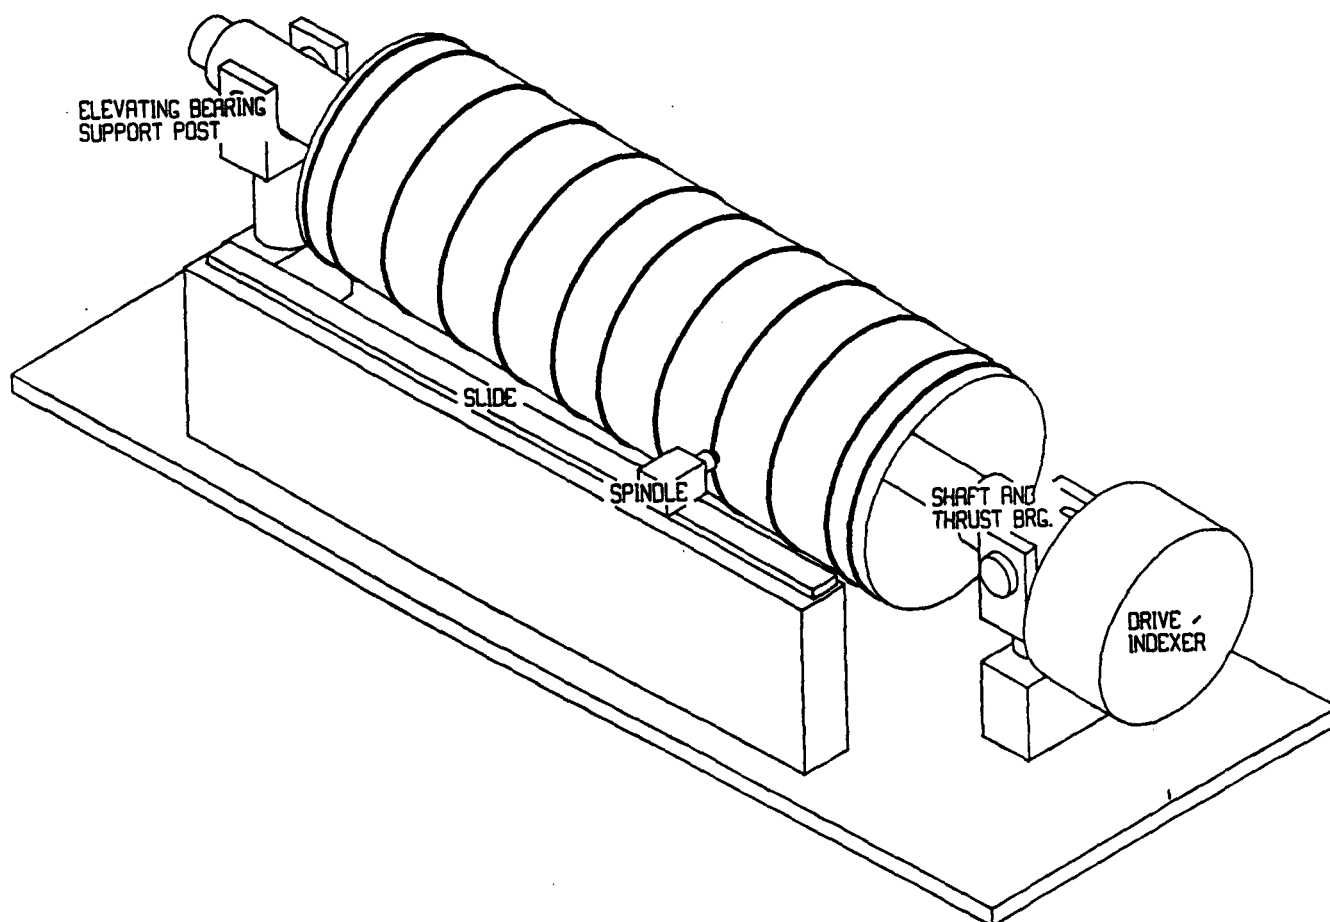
Machining of the shim rings on a completed cylinder.
